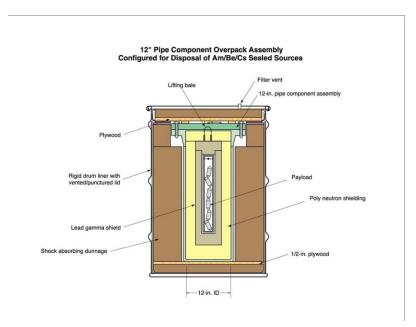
12 in. Pipe-component-overpack assembly configuration
